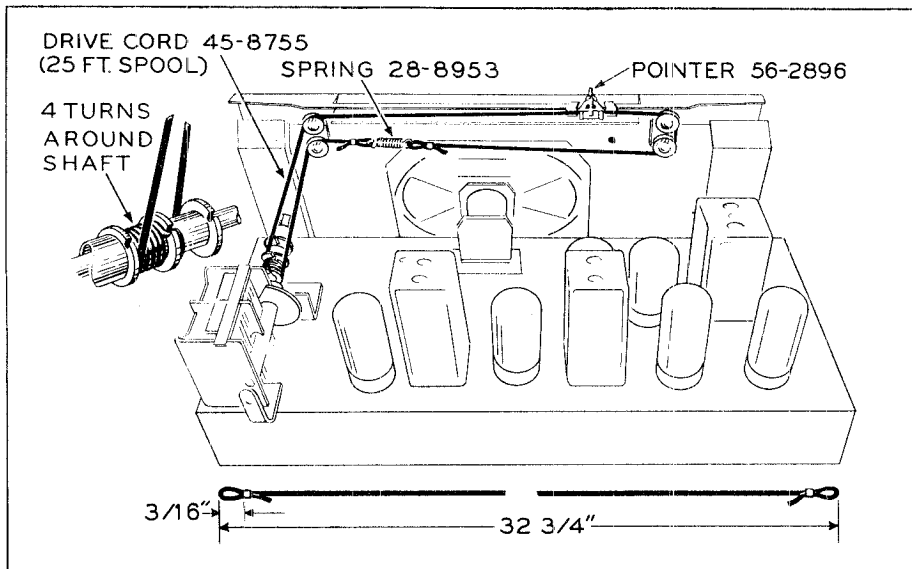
DRIVE-CORD INSTALLATION DETAILS.
